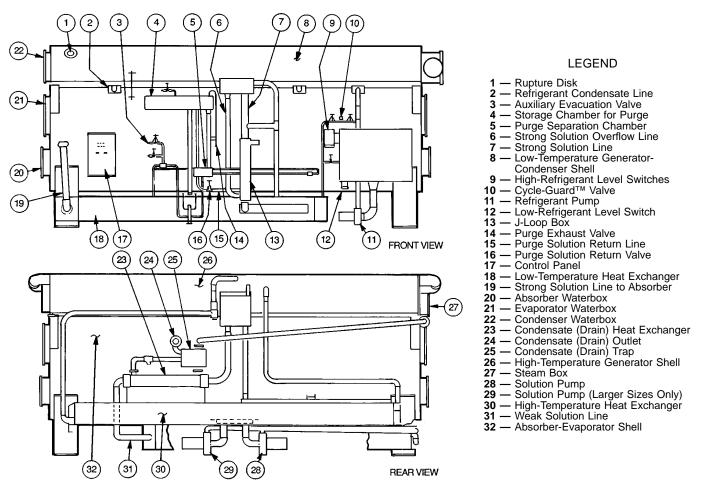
16JT810-880 Machine Components, External Schematic (Typical)
